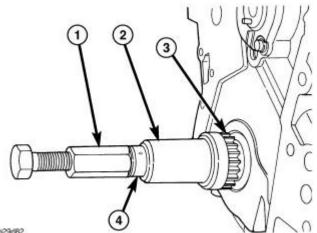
CRANKSHAFT SPROCKET - REMOVAL Courtesy of CHRYSLER LLC
